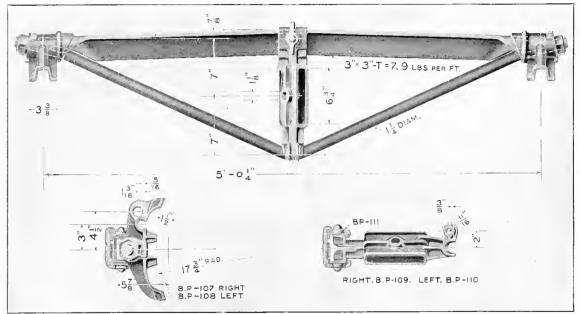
Buffalo Special Brake Beam. Buffalo Brake Beam Co.
